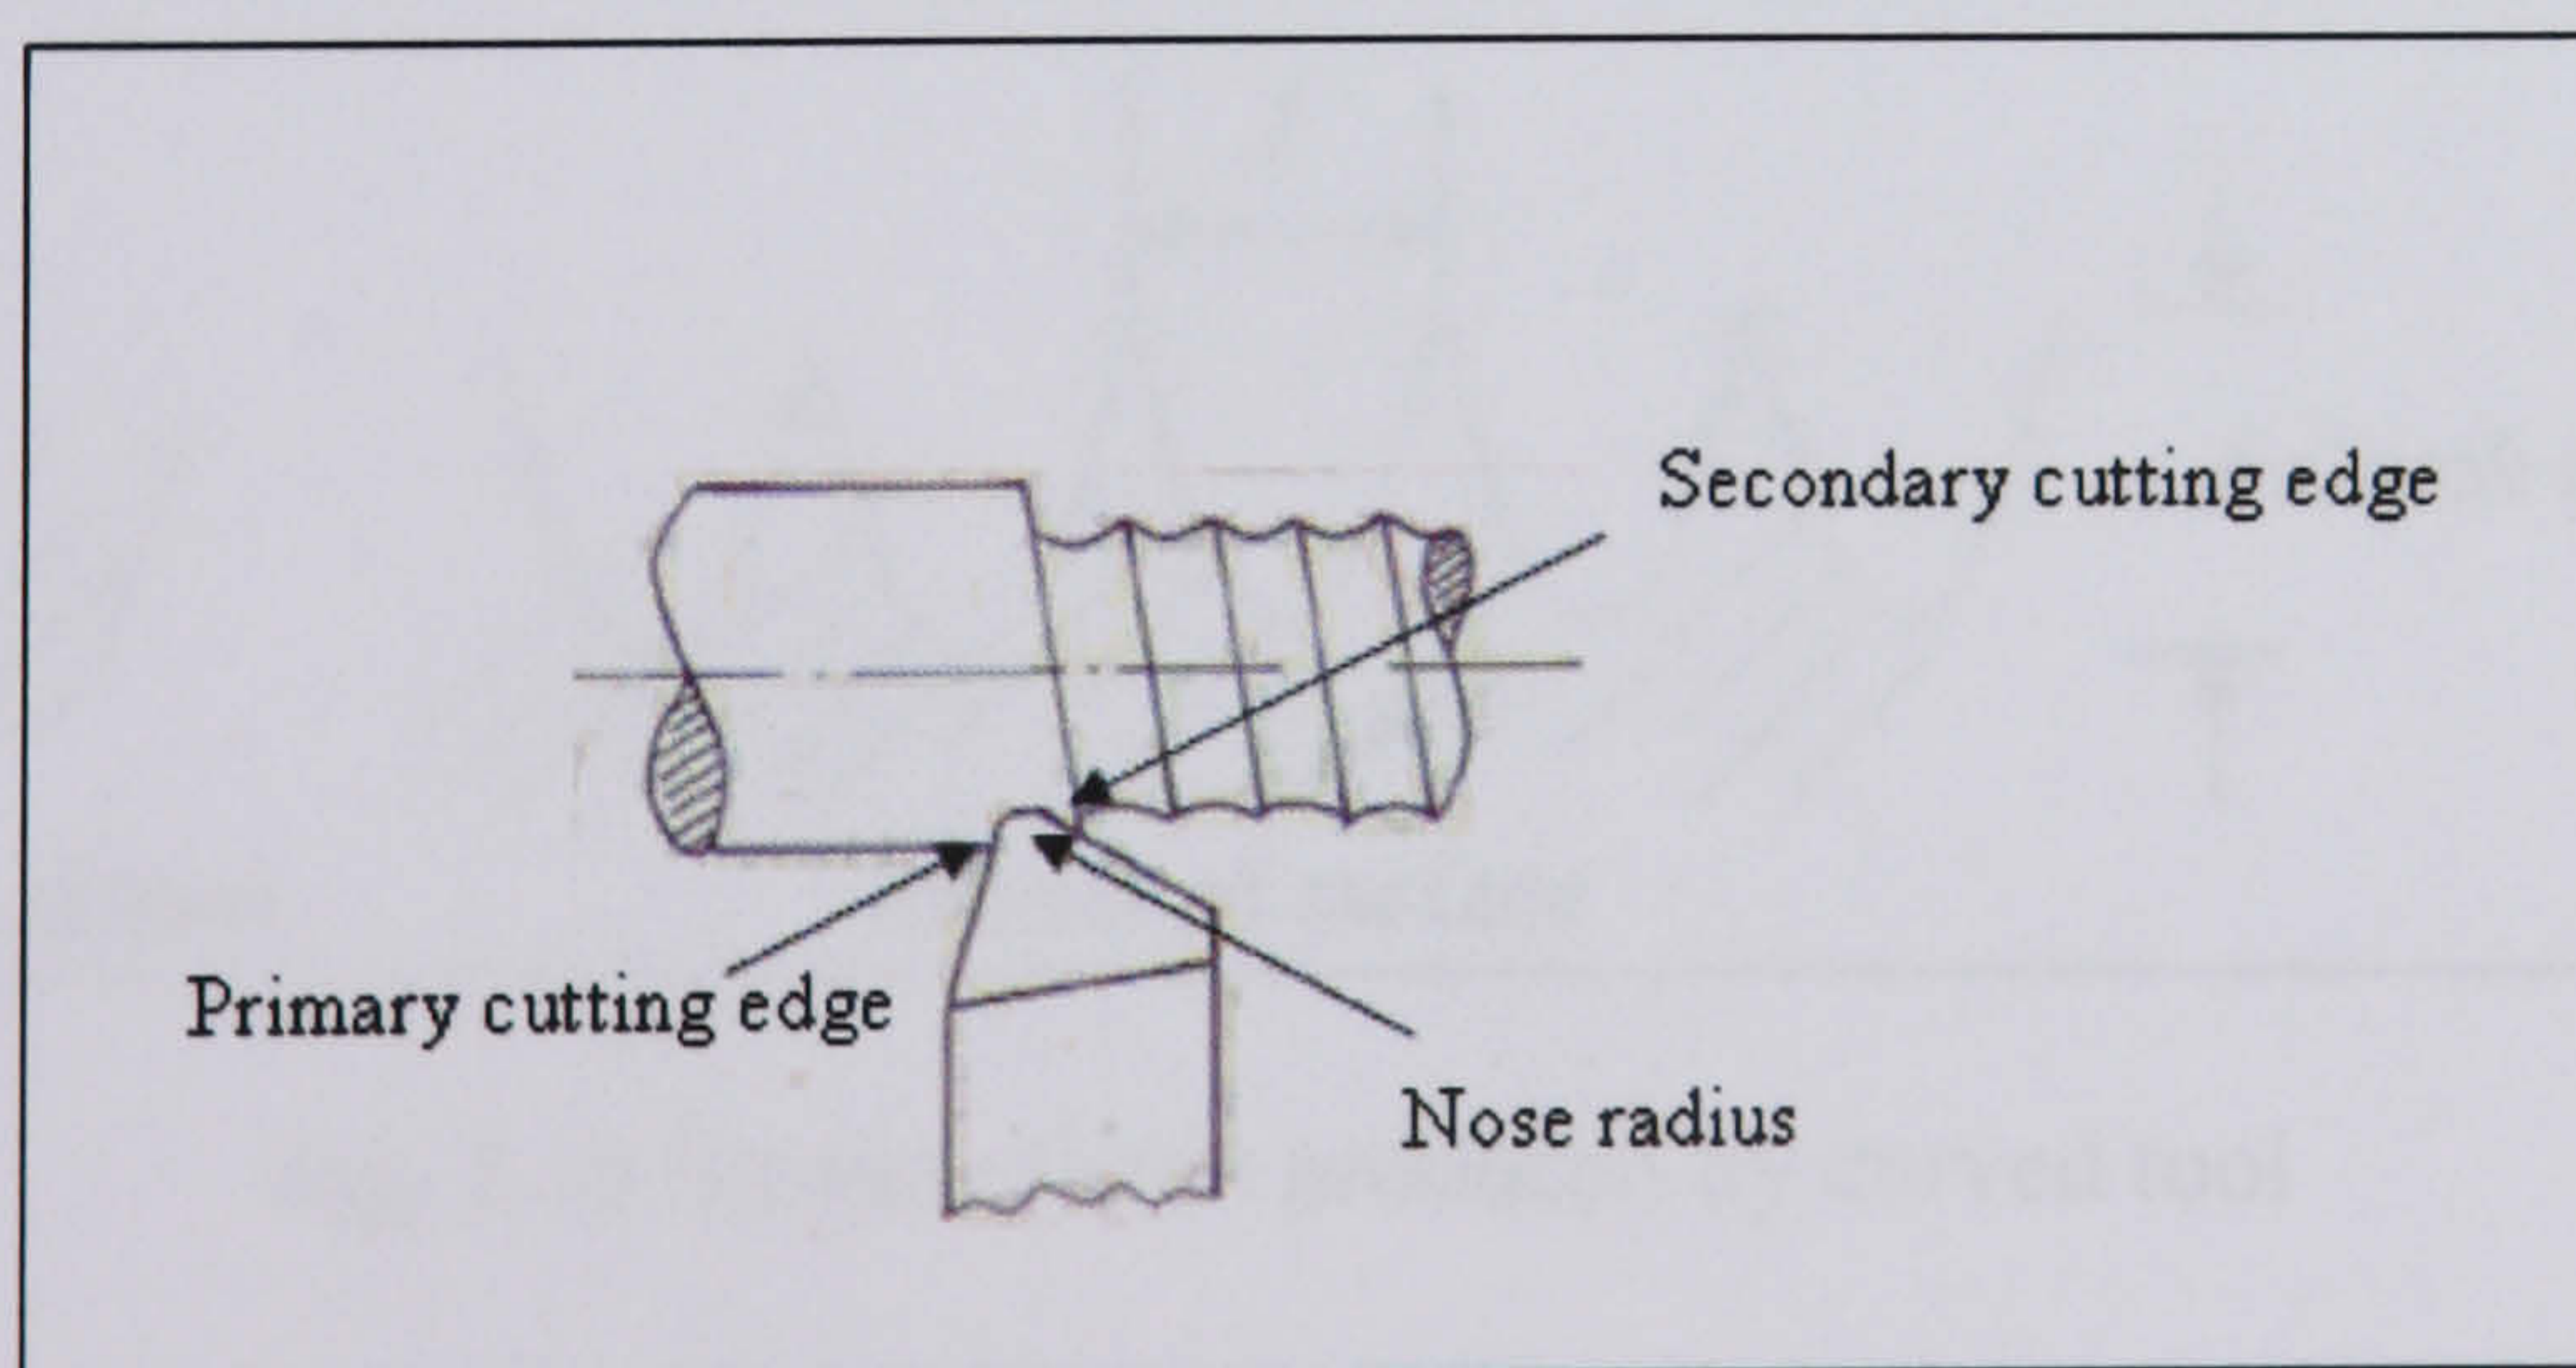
Cutting tool with respect to the two cutting edges [4]
